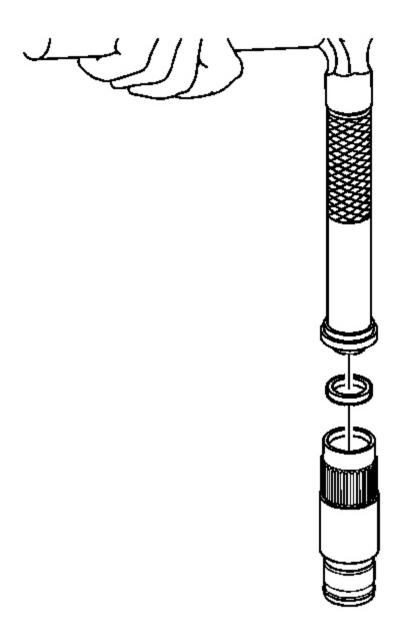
Installing Cup Plug Courtesy of GENERAL MOTORS CORP.
